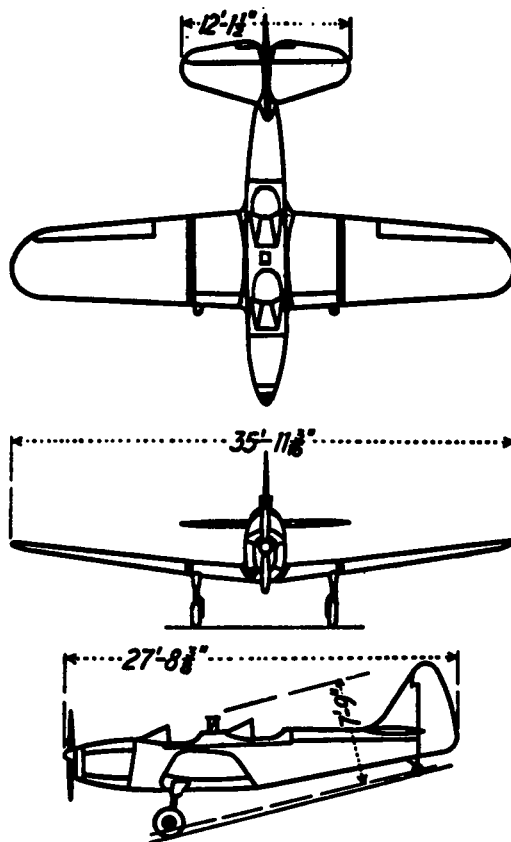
Three-view drawing of Fairchild PT-19 airplane.
